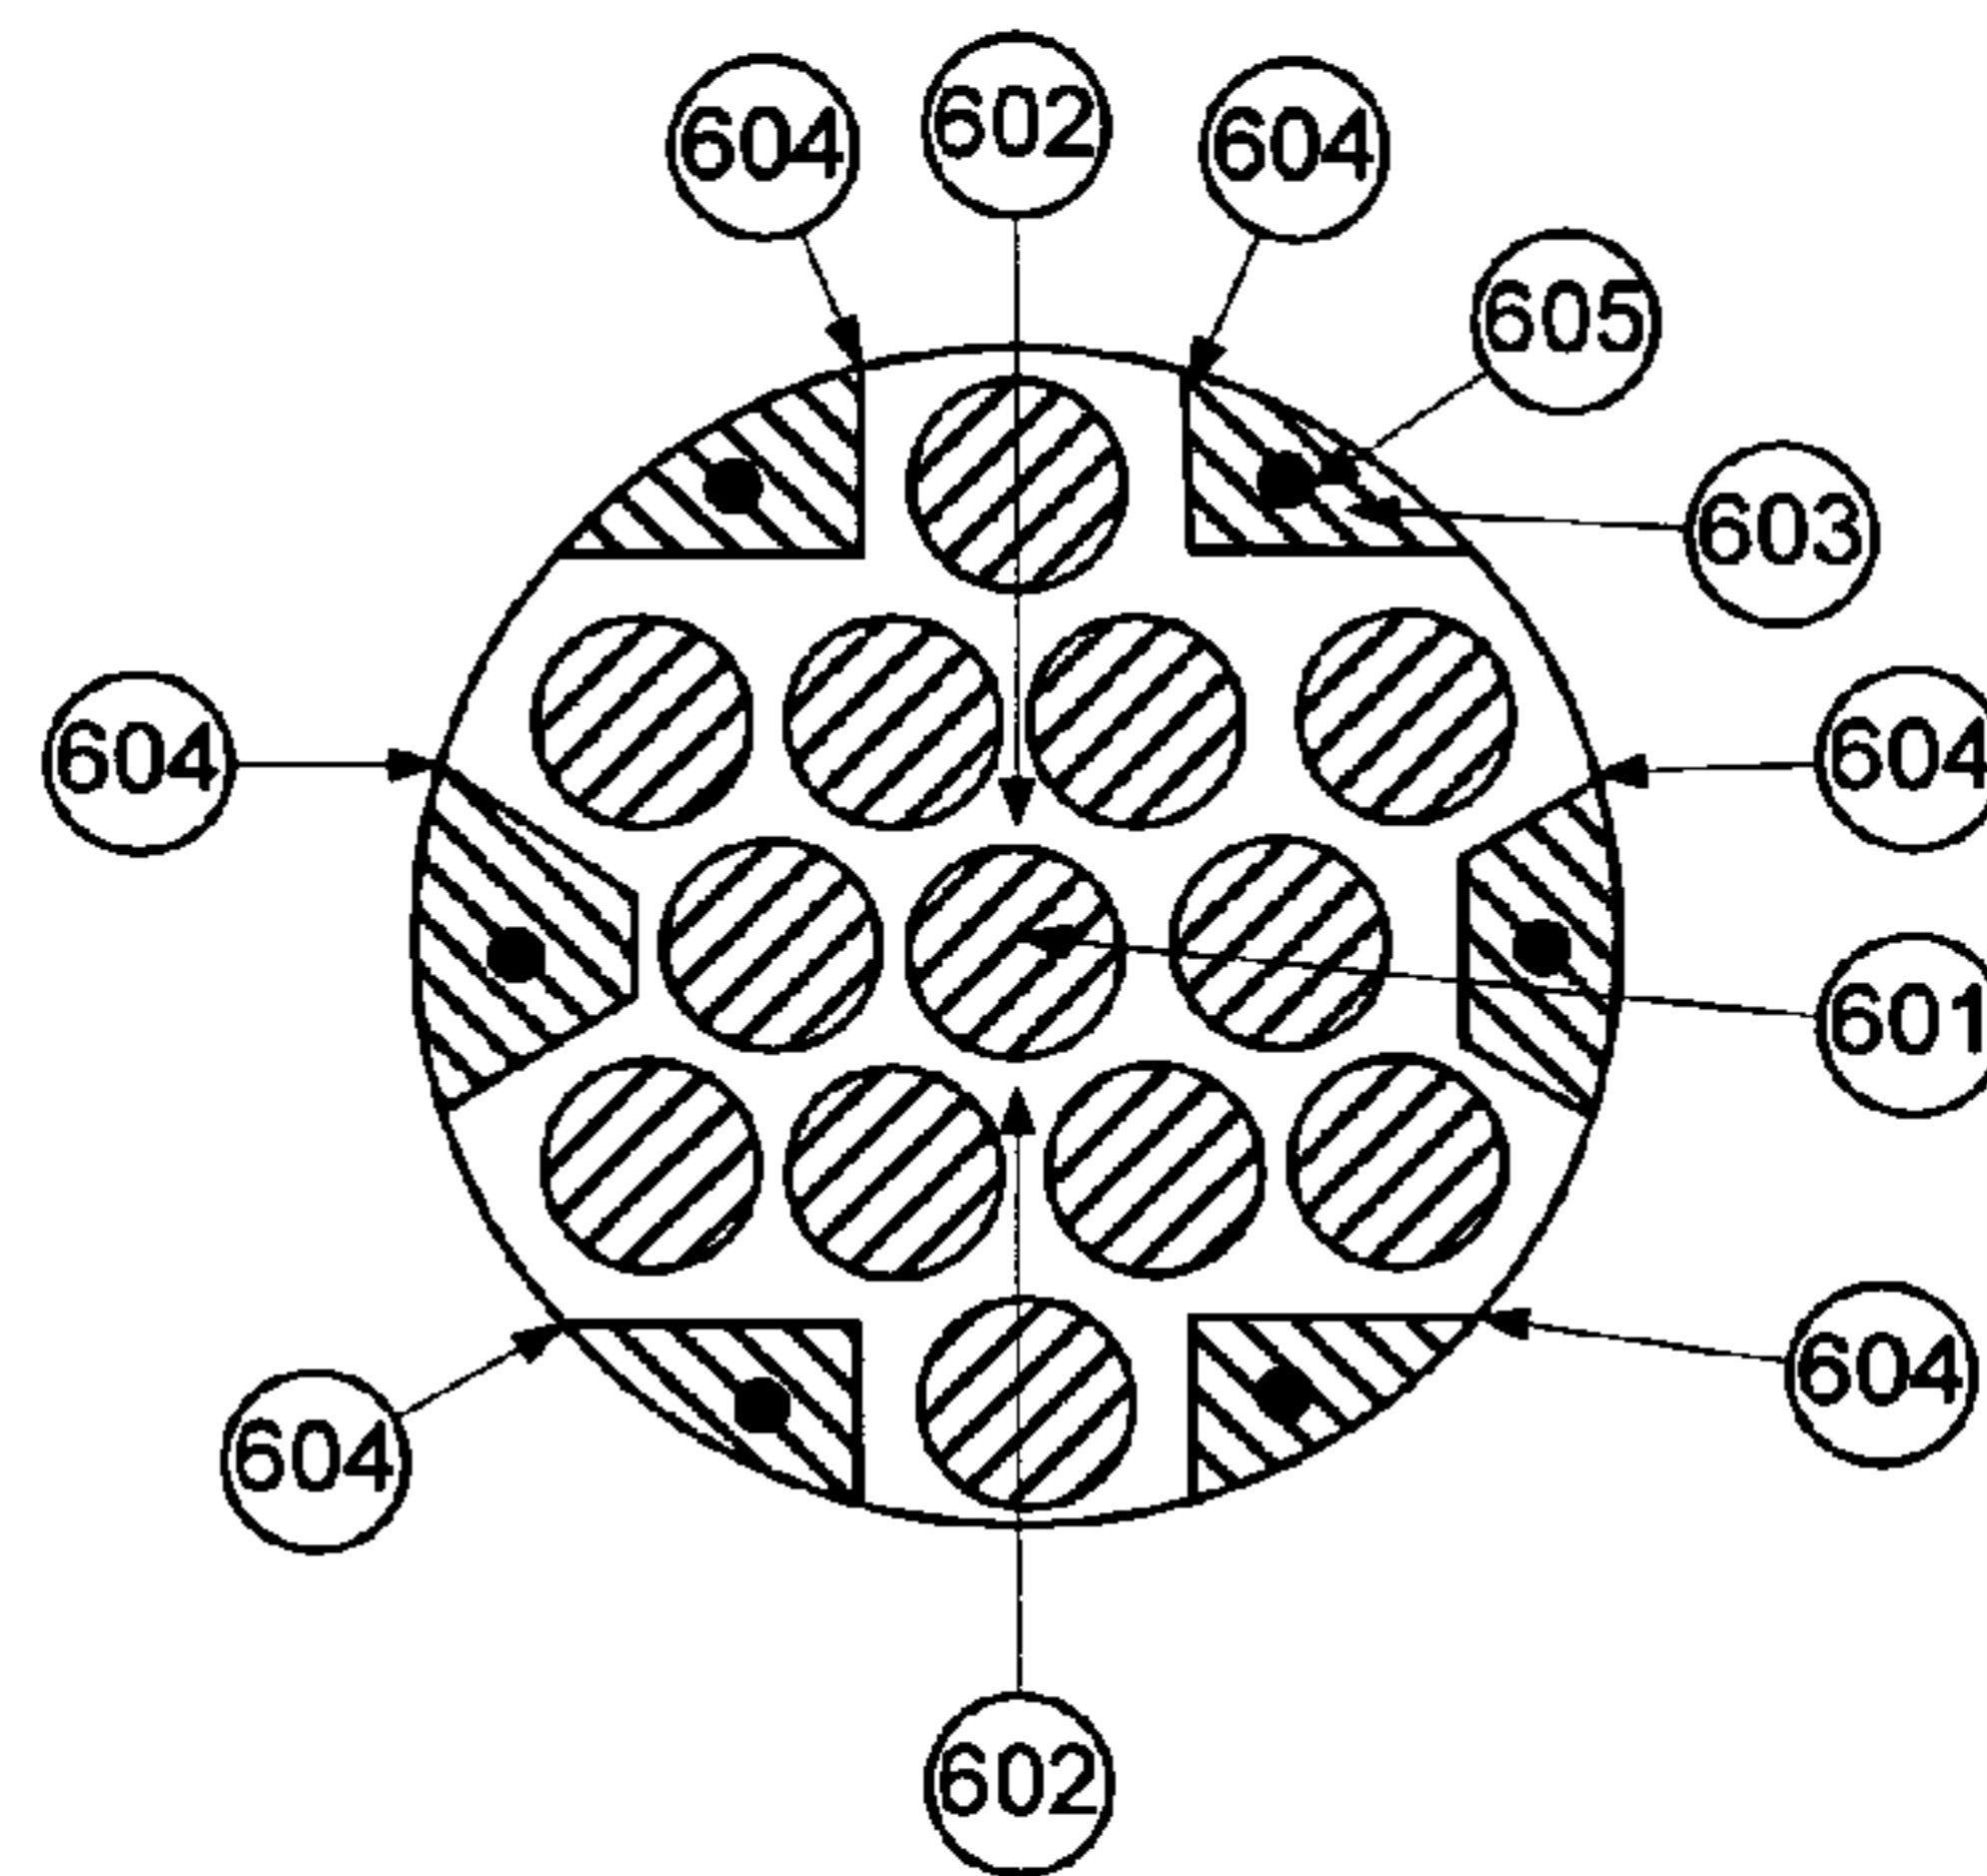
Cross-sectional view of a protective tube layout showing axial flow baffles and spacers
